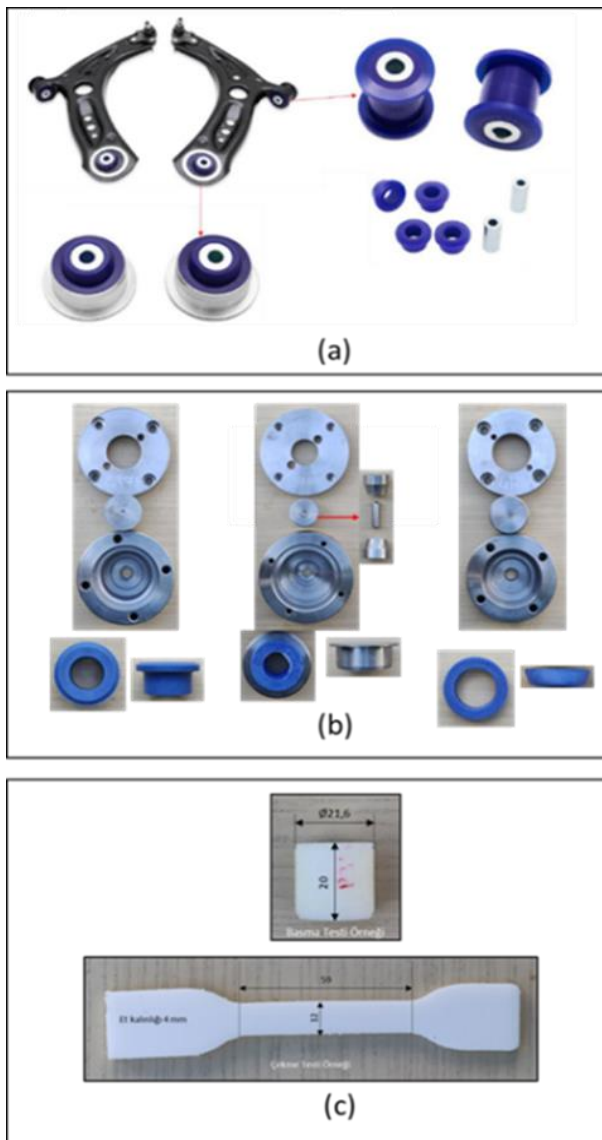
(a) Bushing systems, (b) metal moulds and samples of bushings, (c) tensile and compression specimens.
